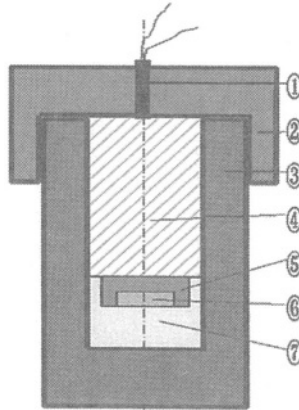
Experimental setup of flat explosive compaction (open configuration). ①=detonator, ②=centering ring, ③=alloyed steel casing, ④=explosives, ⑤=Cu target plate, ⑥=powder sample, ⑦=alloyed steel die.
